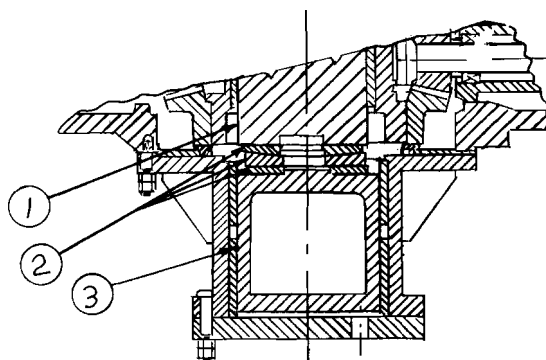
Sectional view of hydraulic support assembly (courtesy of Allis-Chalmers). Legend: (1) main shaft, (2) thrust-bearing assembly, (3) hydraulic piston.
